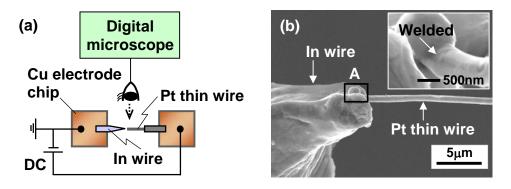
(a) Setup for welding the Pt thin wire onto the In wire by Joule heating. (b) The welded Pt/In structure. The magnification view of the part A is inserted in the same figure.
